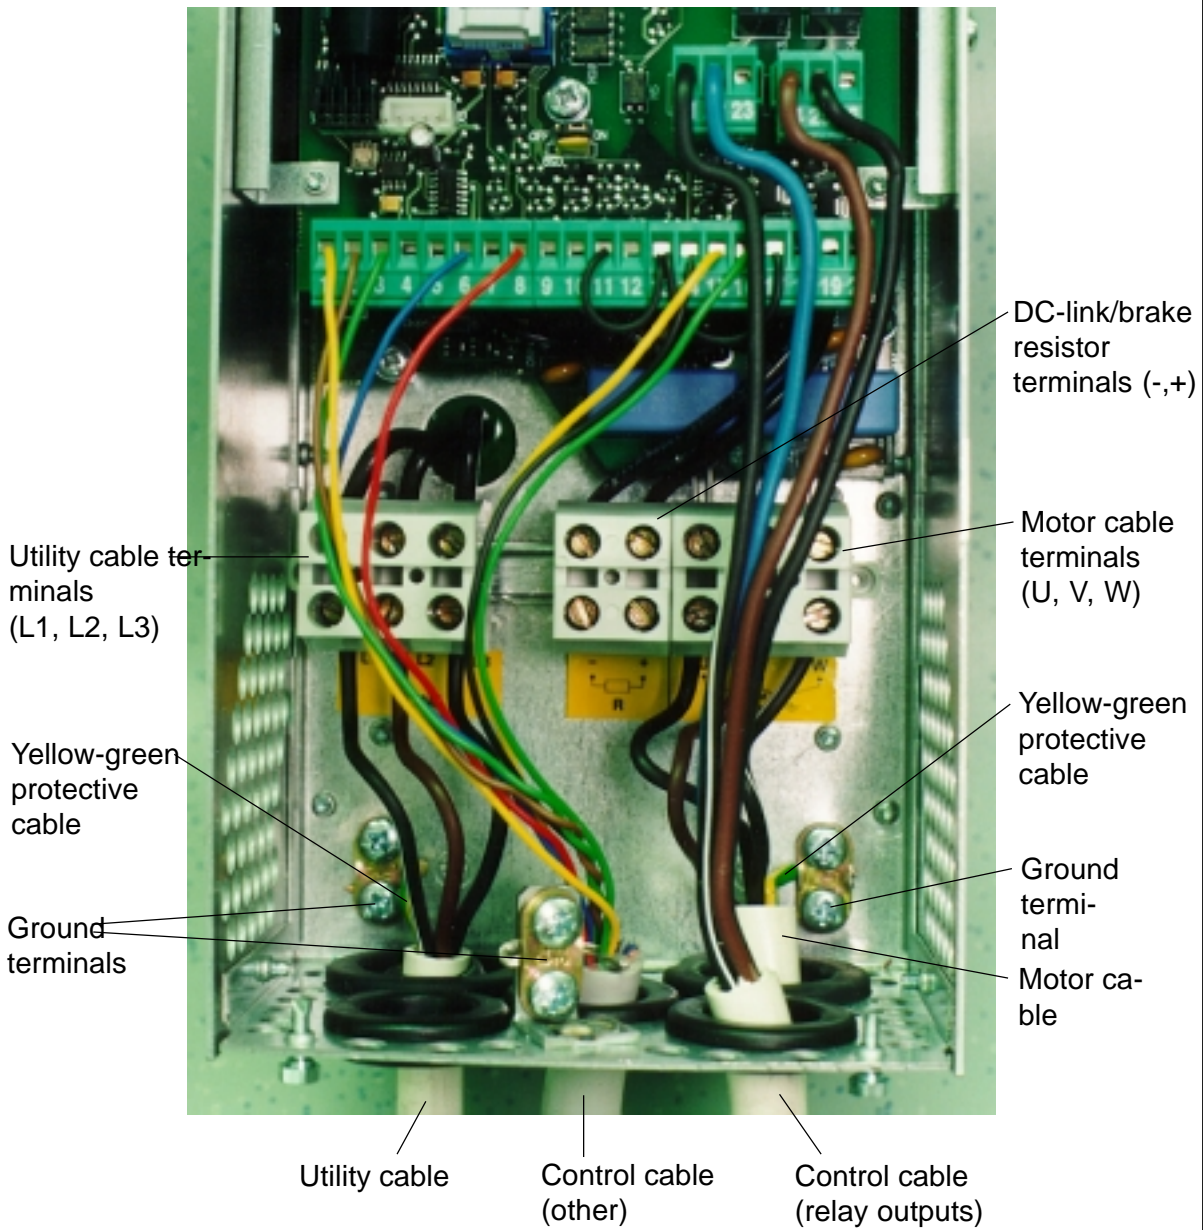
Cable assembly for compact NEMA1: CXS 0050-0150HP V 3 5.
